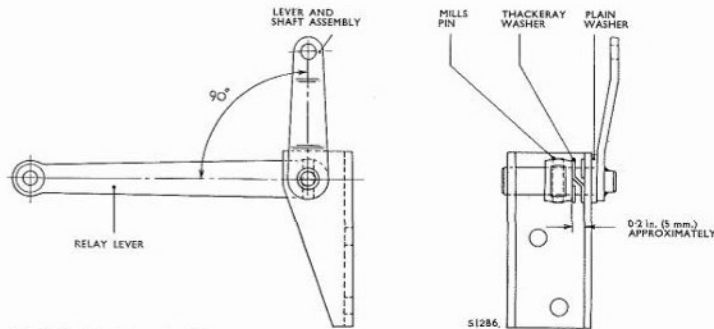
Accelerator relay shaft arrangement, showing the angular disposition of the relay levers (L.H.D. Models)
